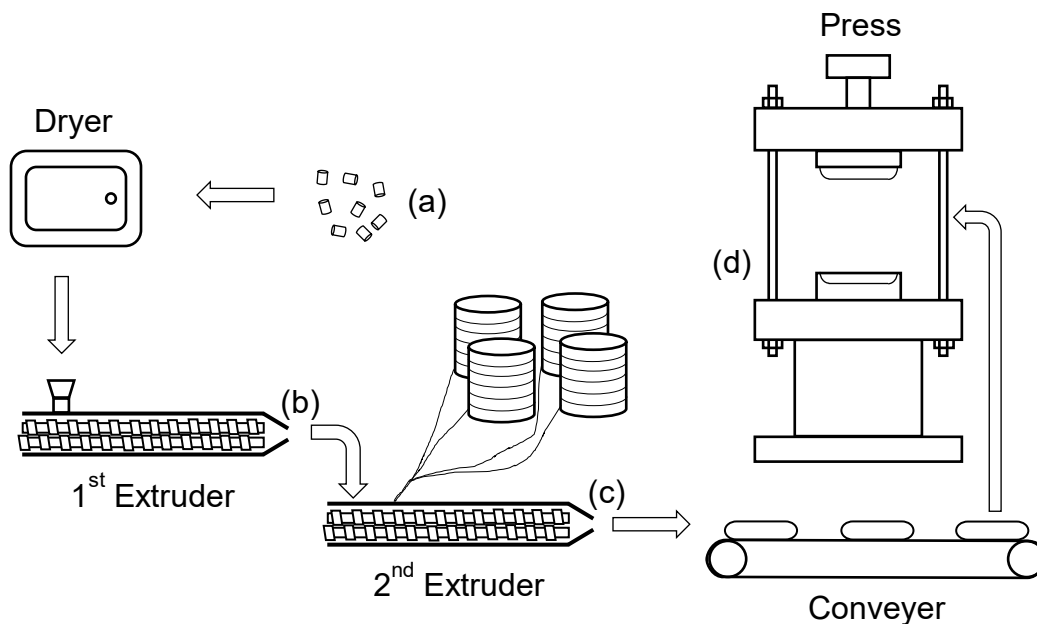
Schematic of D-LFT process with identified equipment as well as indicated locations for sample collection: (a) virgin, (b) first extruder, (c) second extruder, and (d) compressed plaque samples.
